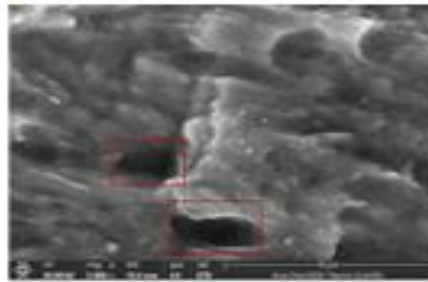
illustrates that smaller tool diameters (6 mm) lead to more dimples on the fracture surface, indicating a greater degree of ductile deformation before fracture. This is associated with localized shear stress that promotes ductile fracture behavior. For intermediate tool diameters (10 mm), the characteristics lie somewhere between the extremes of the smaller and larger tool
